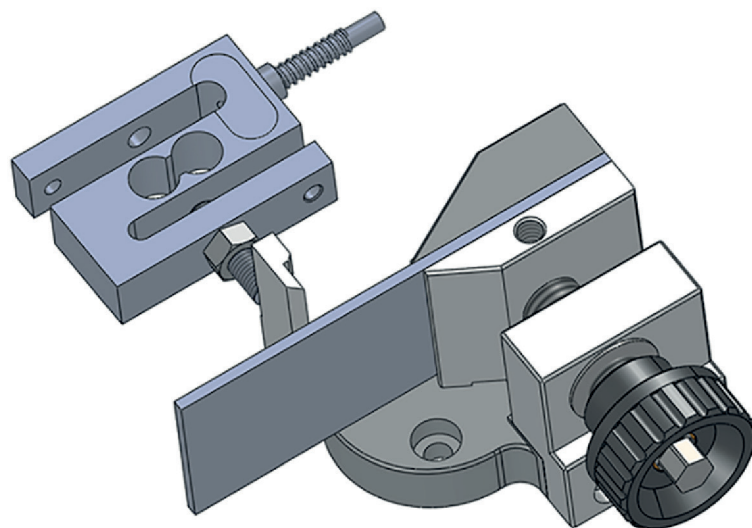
3D drawing of clamping jaws with specimen, load cell and bar
